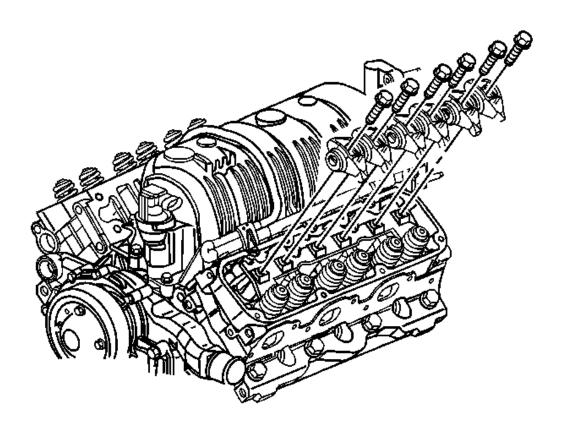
Rocker Arm & Bolts Courtesy of GENERAL MOTORS CORP.
